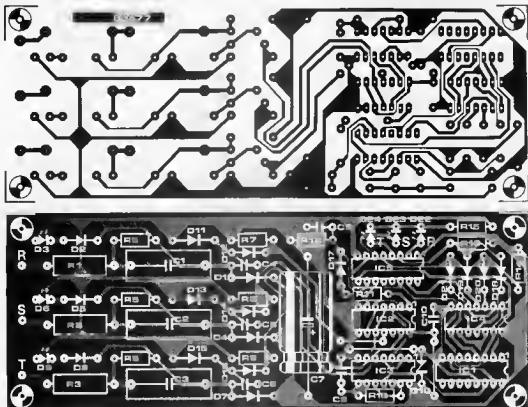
and 4. All the necessary components are mounted on the printed circuit board. The component layout of the printed circuit board.
